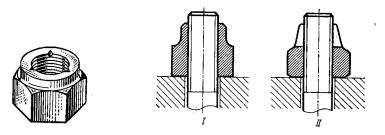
Nut with deformed thread Fig. 630. Nuts with squeezed crowns *I*—solid; *II*—slotted
